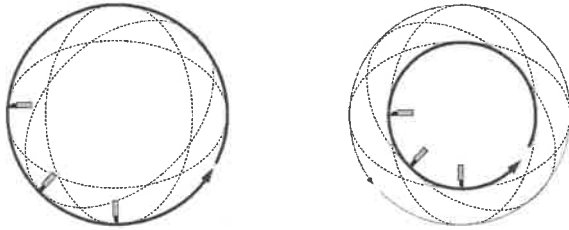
Boring with a bent rotor, vertical axis. Viewed from the stator, the axis of rotation moves in and out twice per turn, but viewed from the rotor the path is circular. Thus a fixed tool cuts ovals while a rotating tool cuts circles.
